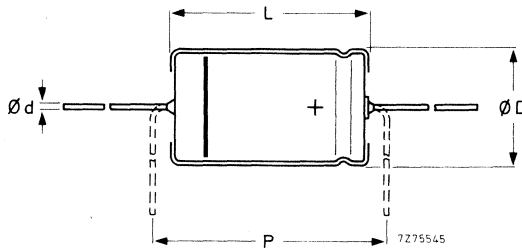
Style 1; see Table 1a for dimensions d, D, L and P.
